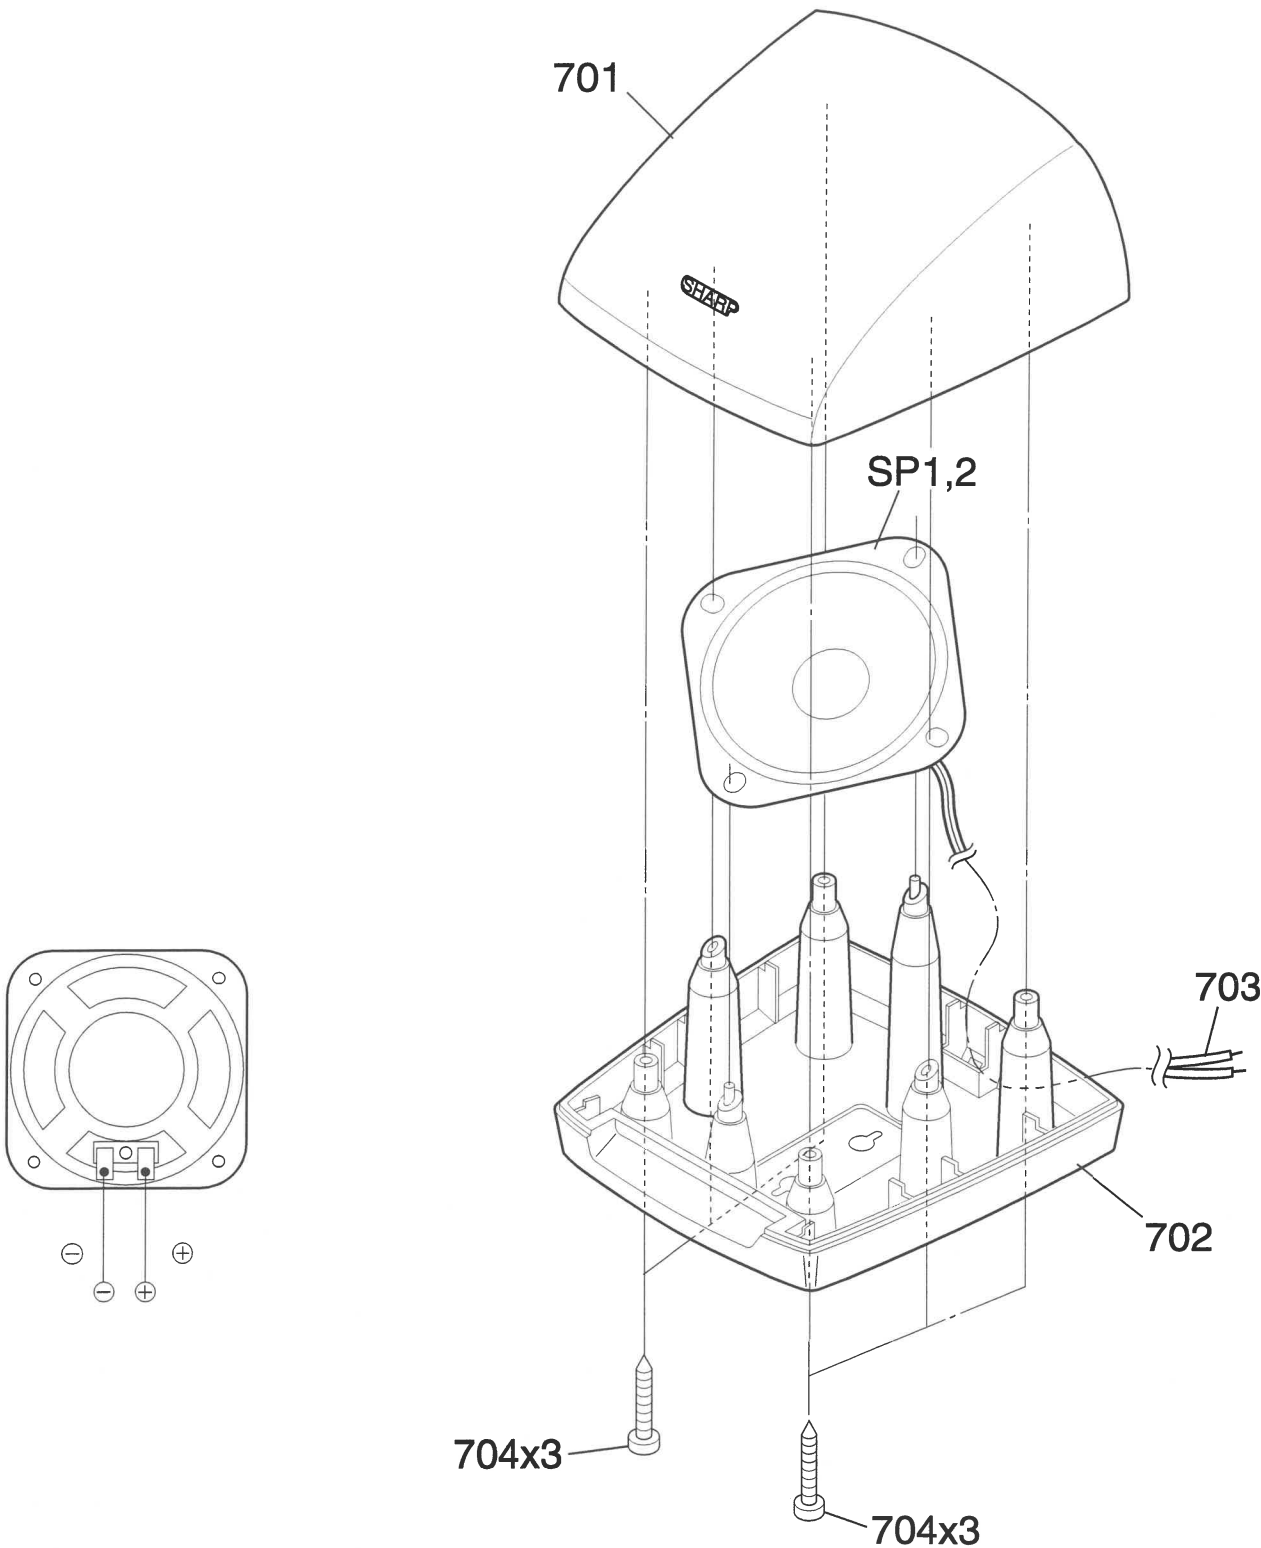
SPEAKER EXPLODED VIEW (2/3)
